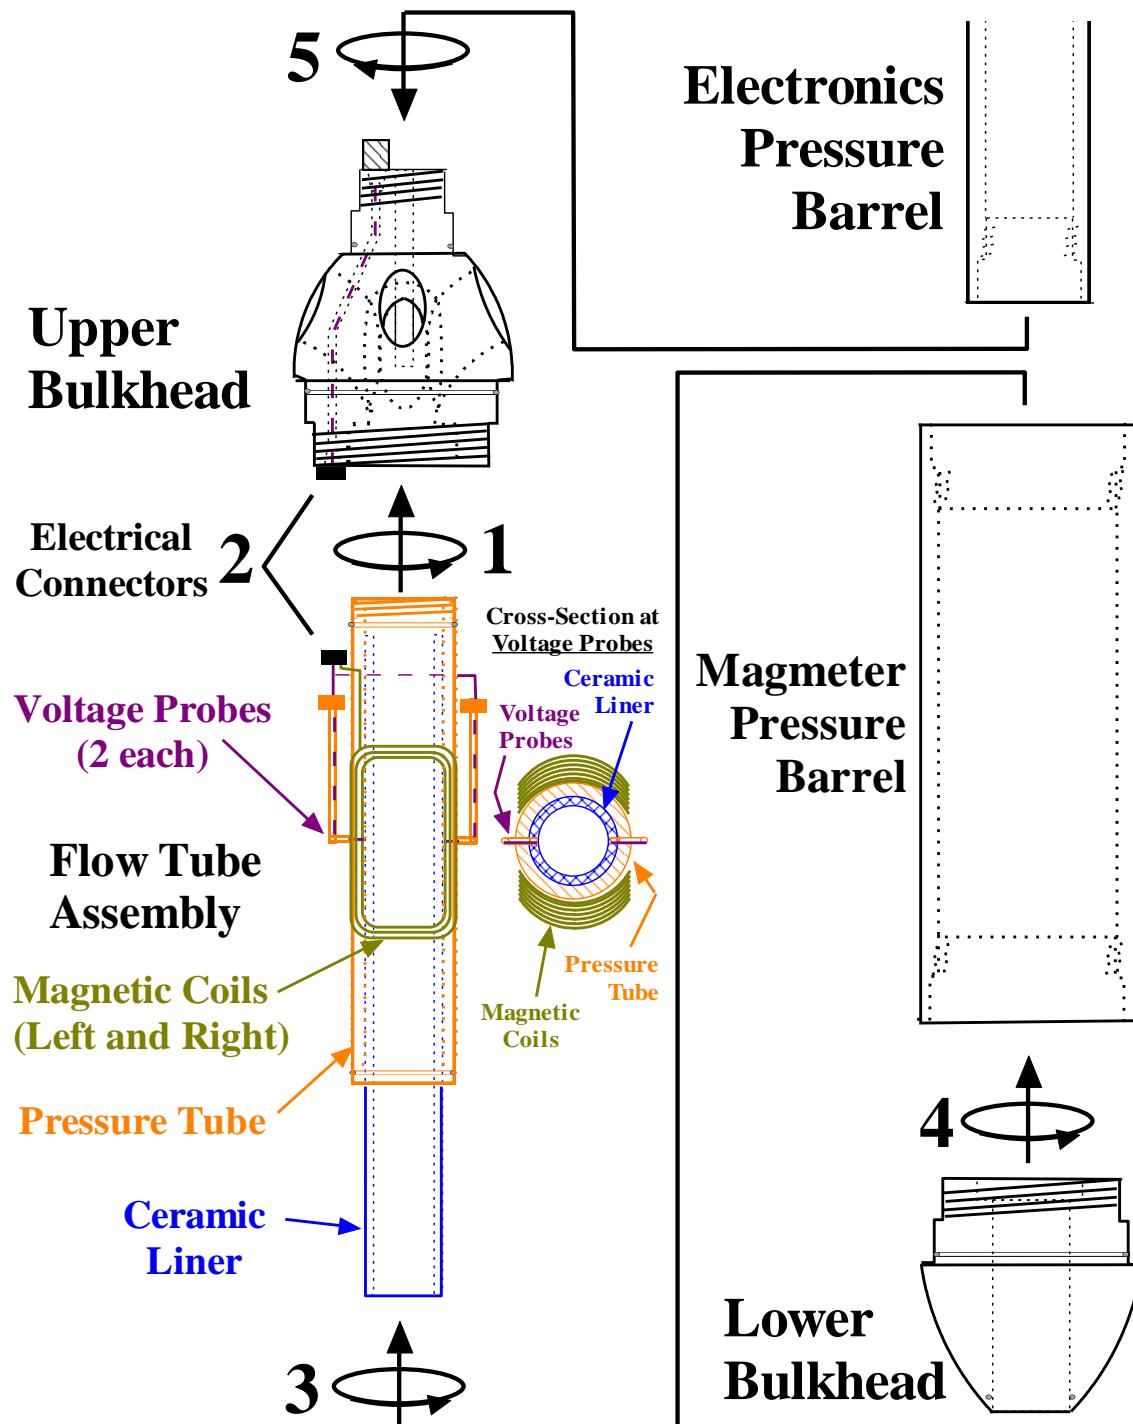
Assembly of the Downhole Magnetic Flowmeter
